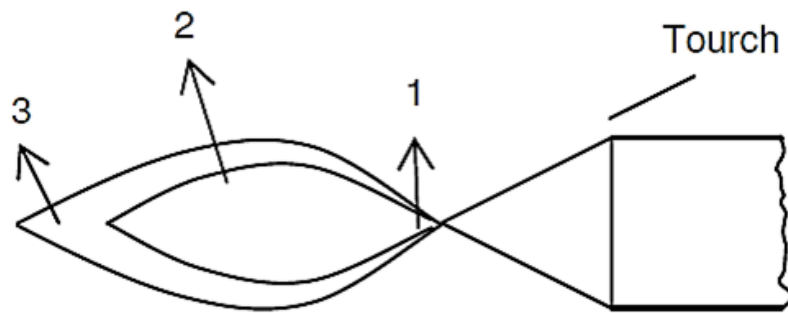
Flame establishment in oxy-acetylene welding
